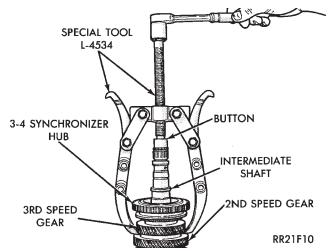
Remove 3-4 Synchronizer Hub and 3rd Speed Gear
